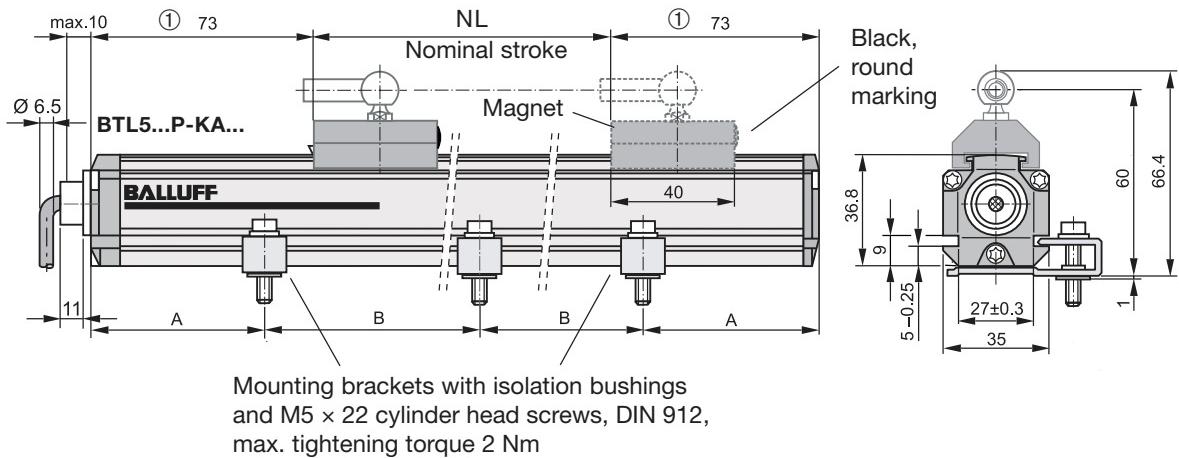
Dimensional drawing (BTL5...P-... transducer with captive magnet BTL5-F-2814-1S)
